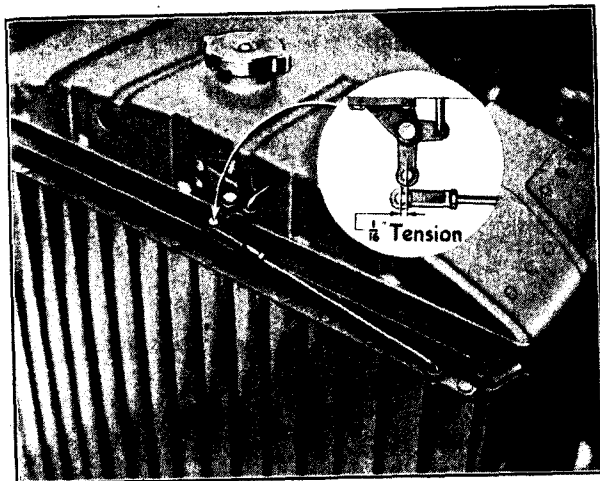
Radiator thermostat connections, series 38-90, and rod adjustment, all series.
